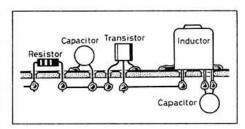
Wired-track construction on single-sided board, copper side uppermost
